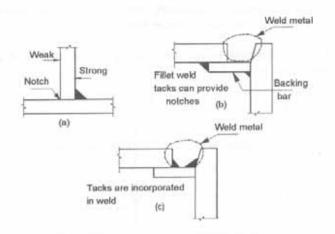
Improved Welded Connections to Reduce Lamellar Tear
